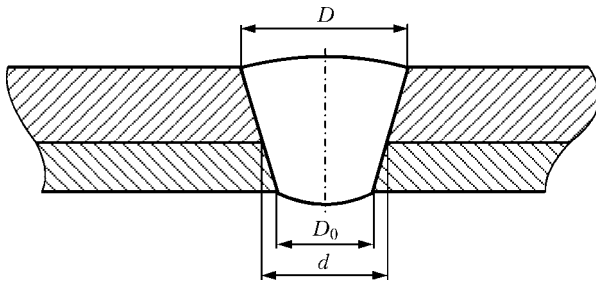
Cross-section of weld spot: D , D_0 — diameters of fusion zone from the face of weld spot and its reverse side, respectively
